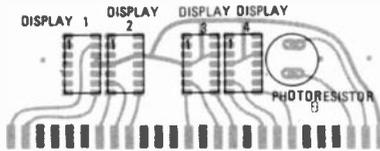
DISPLAY BOARD COMPONENTS LAYOUT. Front view. Bezel mounting holes are centered by drawing a line across board, through the center of the displays. Inner bezel holes accommodate Allied 658-1240 bezel; outer ones the 658-1260. The photoresistor mounting holes are for Archer 276-116 or Clairex CL704L. Photoresistor solder pads are large enough to accommodate Clairex CLM54L if Allied 658-1260 bezel is used.
